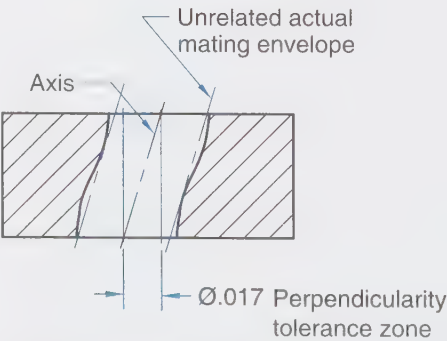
One tolerance specification may be used to refine the requirements of a higher level tolerance specification.
